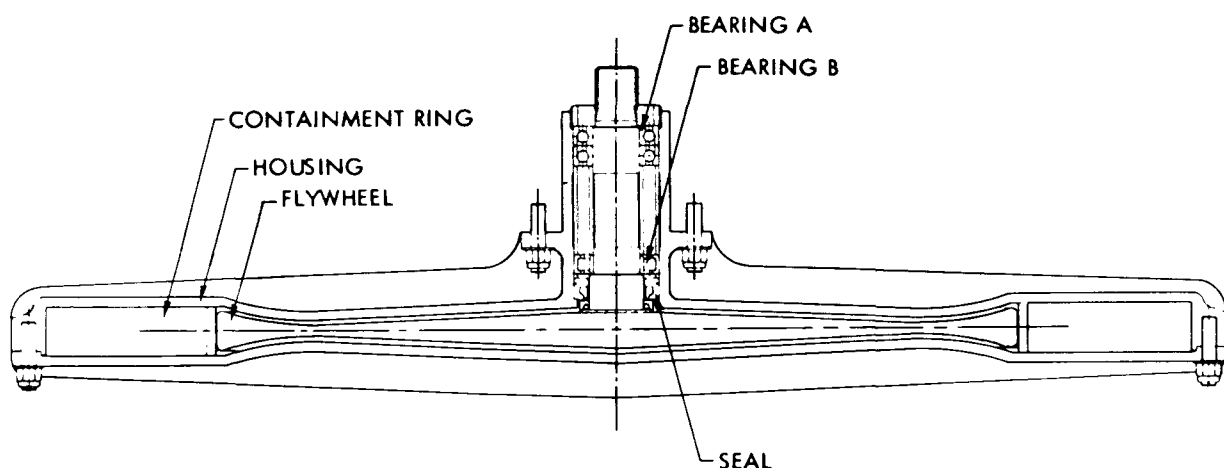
Preliminary Lockheed Flywheel Design -- Family Car (Ref. 3-4)
